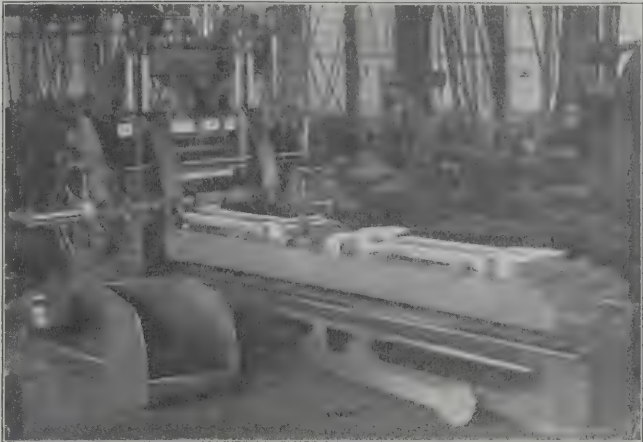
Finishing the Sides of the End Rods in a Slab Milling Machine
